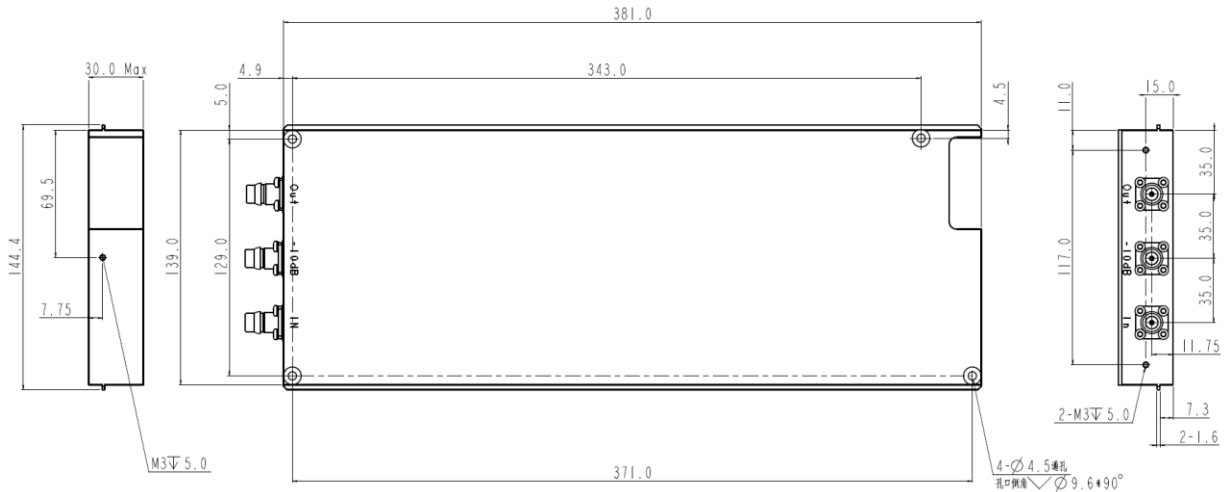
JX-PC-66-500-10QN Coupler front panel layout
